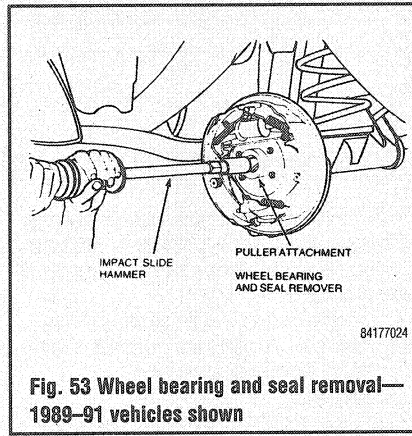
Wheel bearing and seal removal—1989-91 vehicles shown
